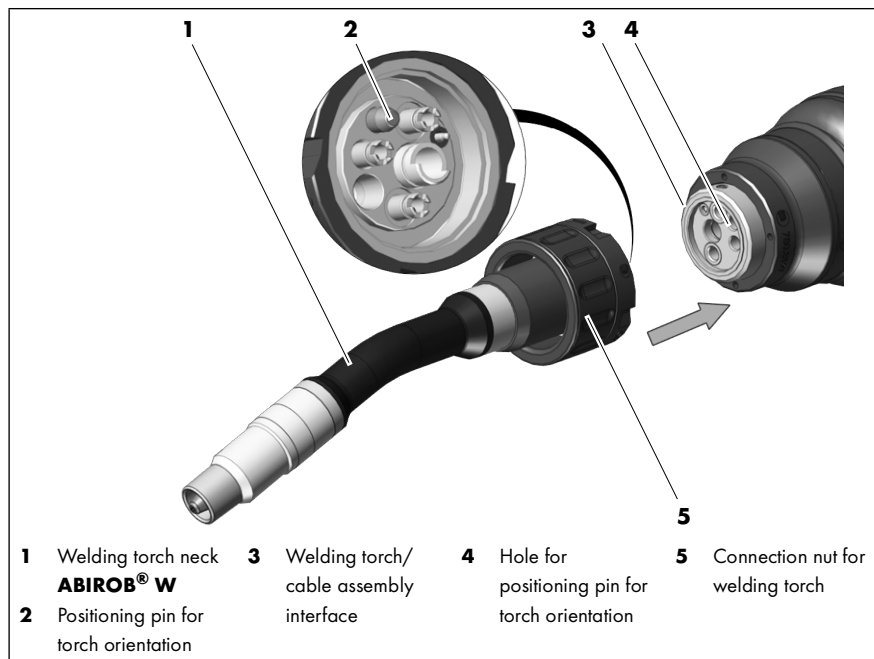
Mounting the welding torch neck ABIROB® W
